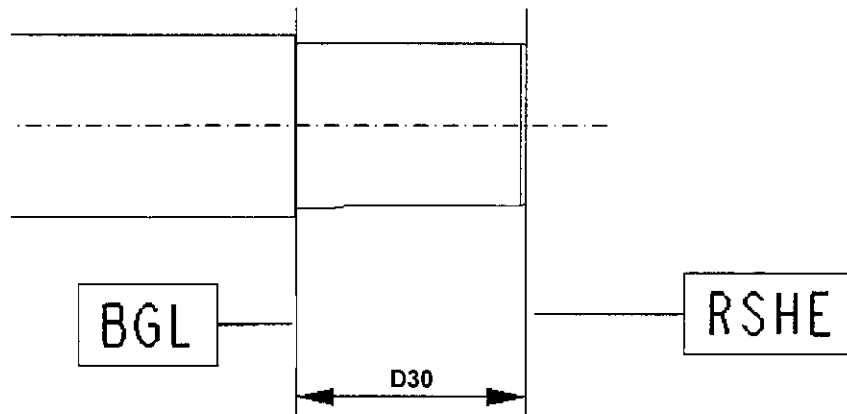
Relation for Bull Gear Width Length of Drive Shaft
